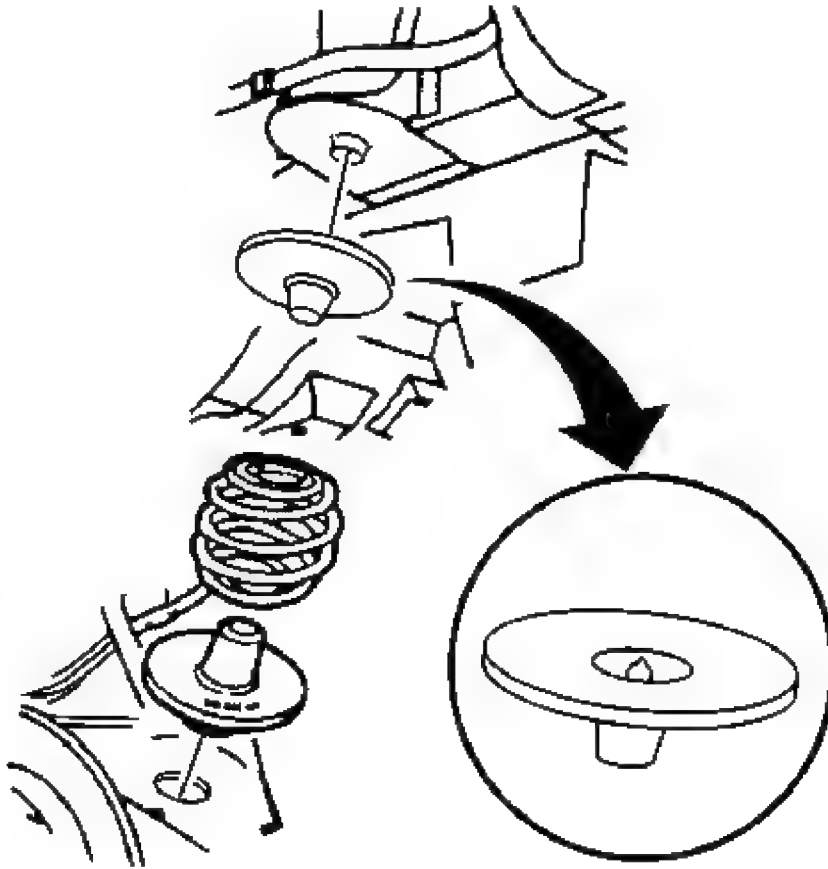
Removing/Installing Upper & Lower Coil Spring Insulator
